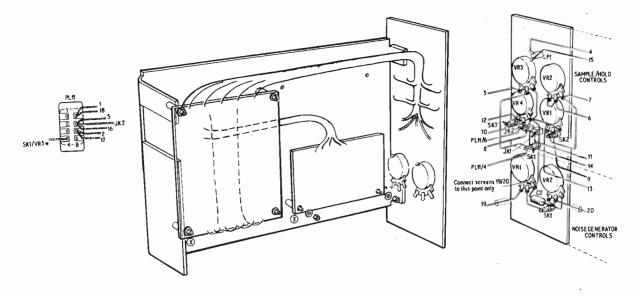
Front panel component assembly with details of mounting and disposition of board on the module support plate. The small ringed X on the board edges indicates orientation. (See board assembly figures) For direct programming from the v.c.o. module connect SK11/4 to SK8/2
